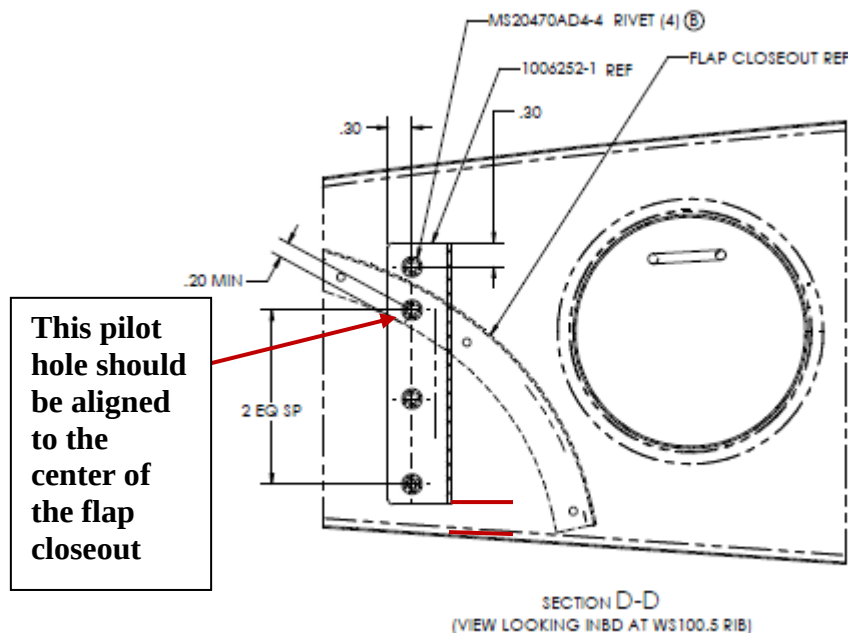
ROLL SERVO MOUNTING ANGLE INSTALLATION
